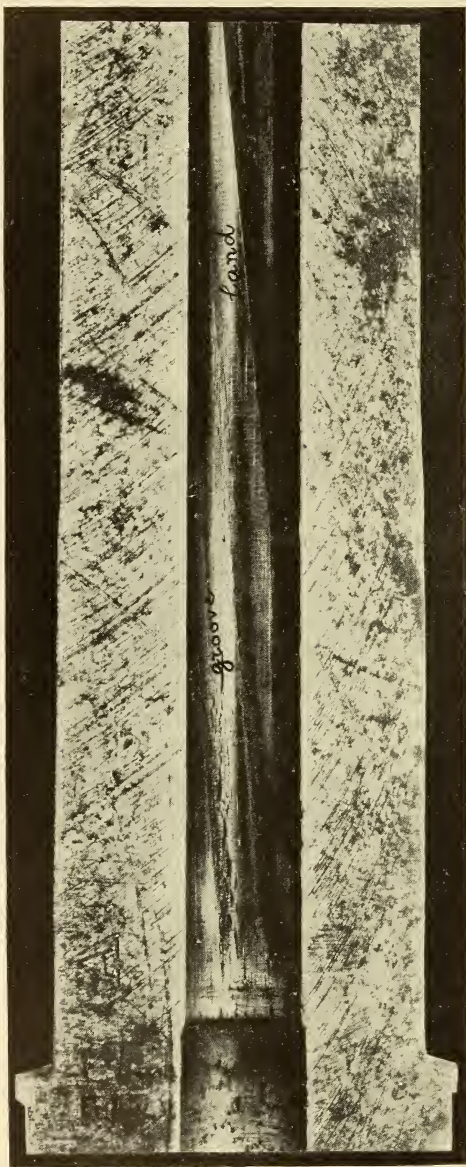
Interior view of gun bore showing cracks agreeing in direction with the marks of the cutter of the machine tool. Gun fired 3880 rounds. $\times 2.3$
